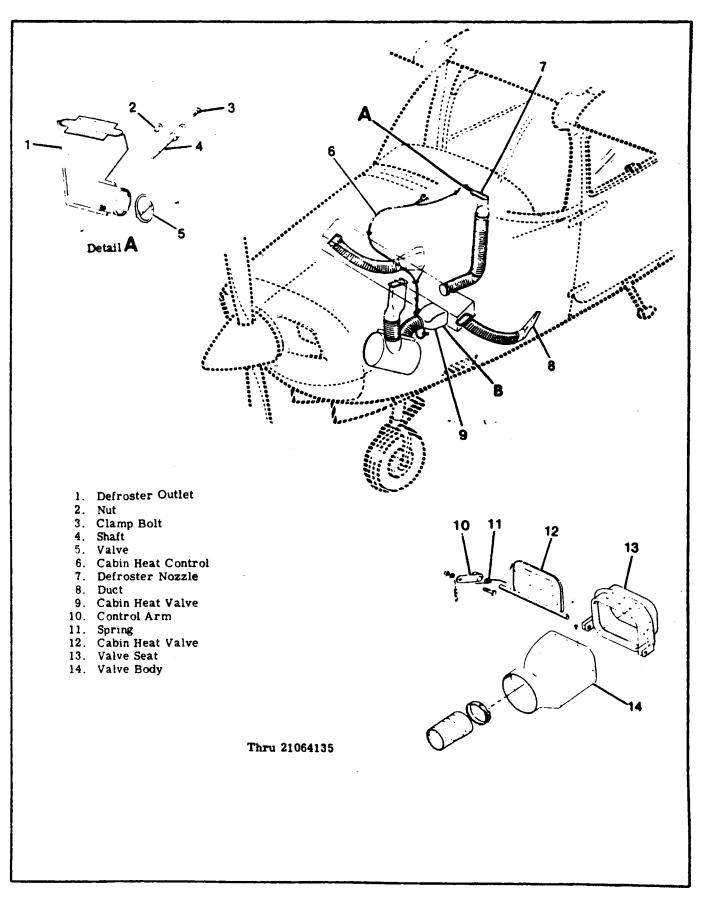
Model 210 Heating and Defrosting System (Sheet 1 of 2)
